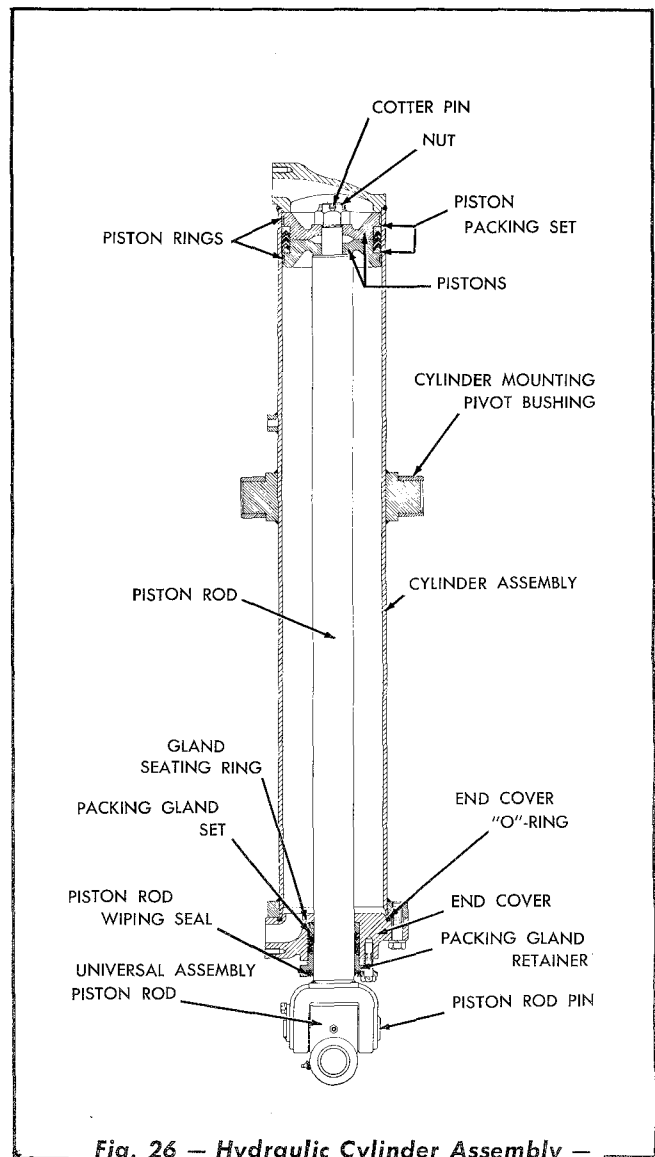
Hydraulic Cylinder Assembly - Sectional View
